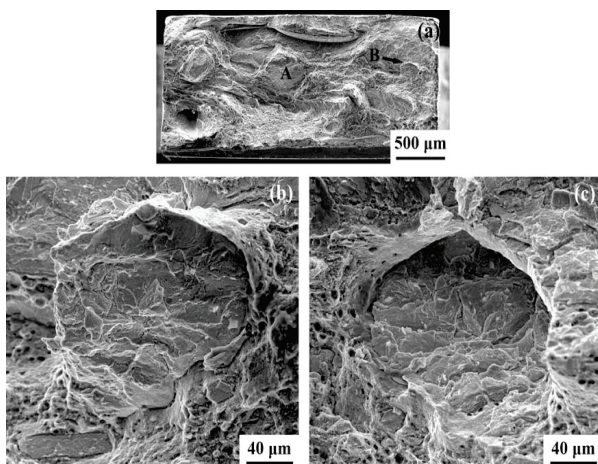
SEM image showing tensile fracture surfaces of FSW joint: (a) macrograph of fracture surface, (b) magnified view of zone B in (a), and (c) the same region as in (b) from other side of a failed specimen.
